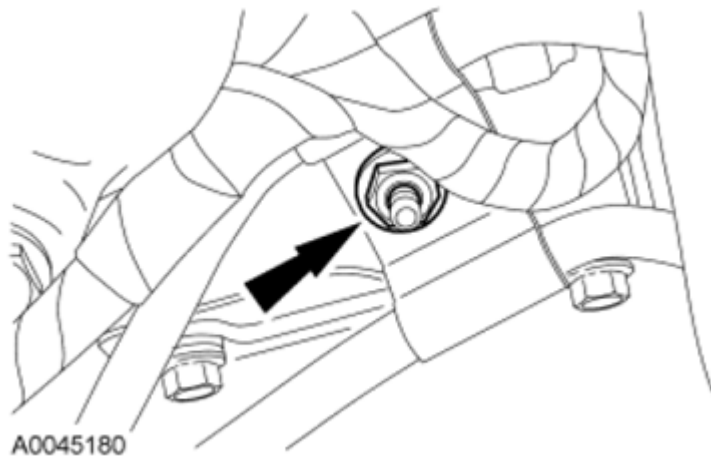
Locating Crankshaft Position (CKP) Sensor Electrical Connector
